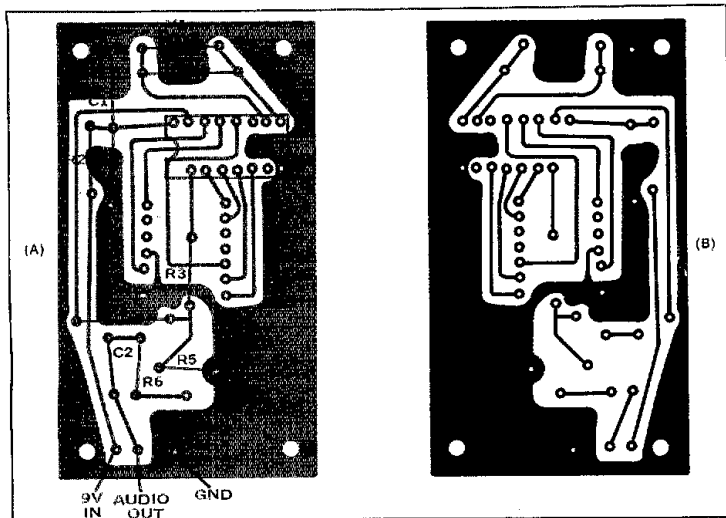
The component side of the Mycoder pc board is illustrated at A. Keyboard mounting holes are drilled to 1/16-inch diameter and Heath sockets are installed. A foil-side view of the pc board at actual size is shown at B, with black representing copper.
